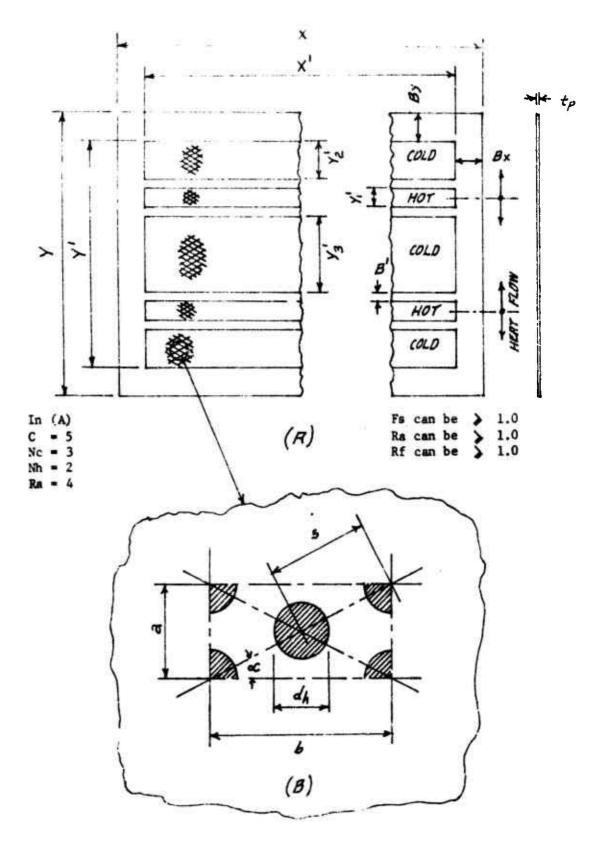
GENERALIZED PLATE CONFIGURATION AND DIMENSIONS.
